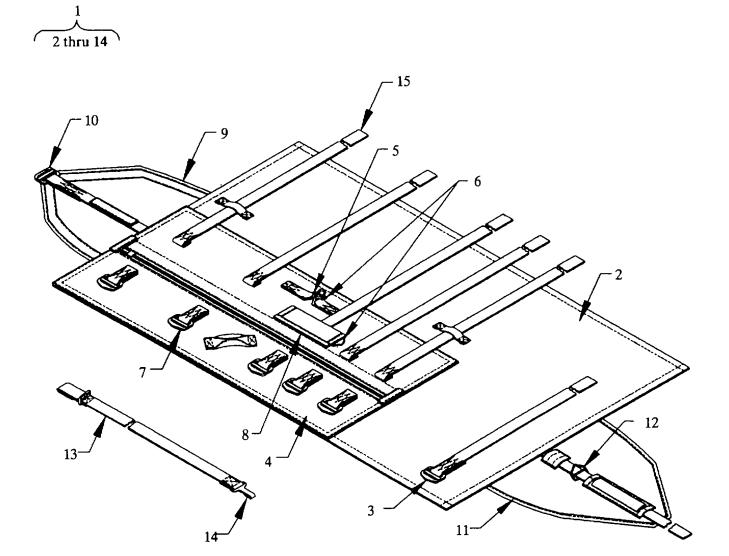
CONTAINER, AERIAL DELIVERY, WEAPONS AND EQUIPMENT, ADJUSTABLE (C-39 blank)/C-40
